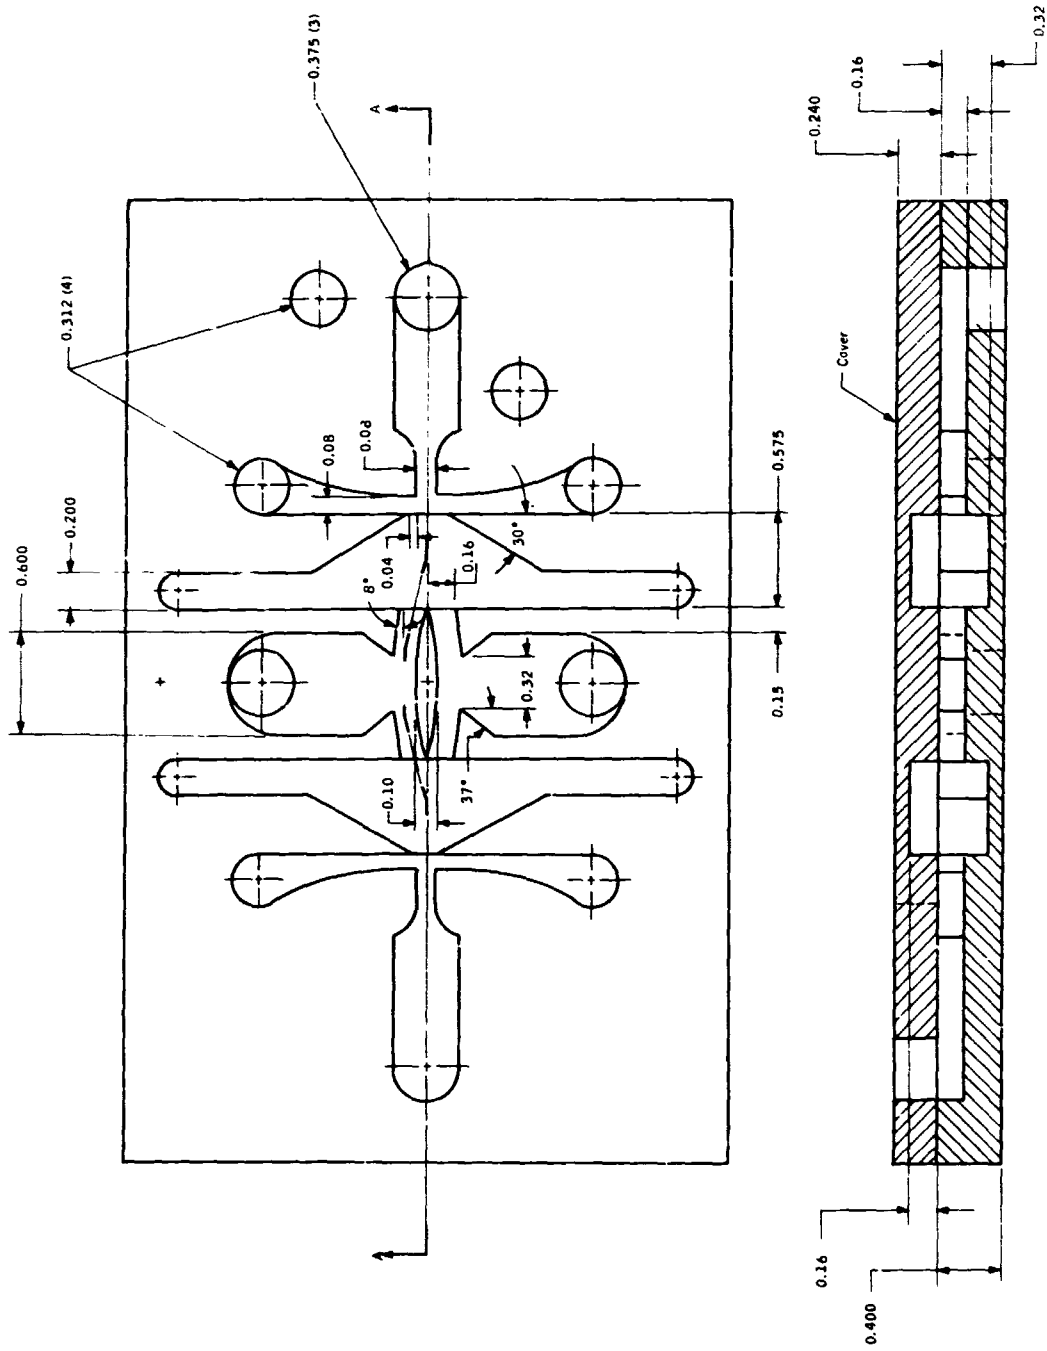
Component Dimensions -- Fluidic Mixing Valve
